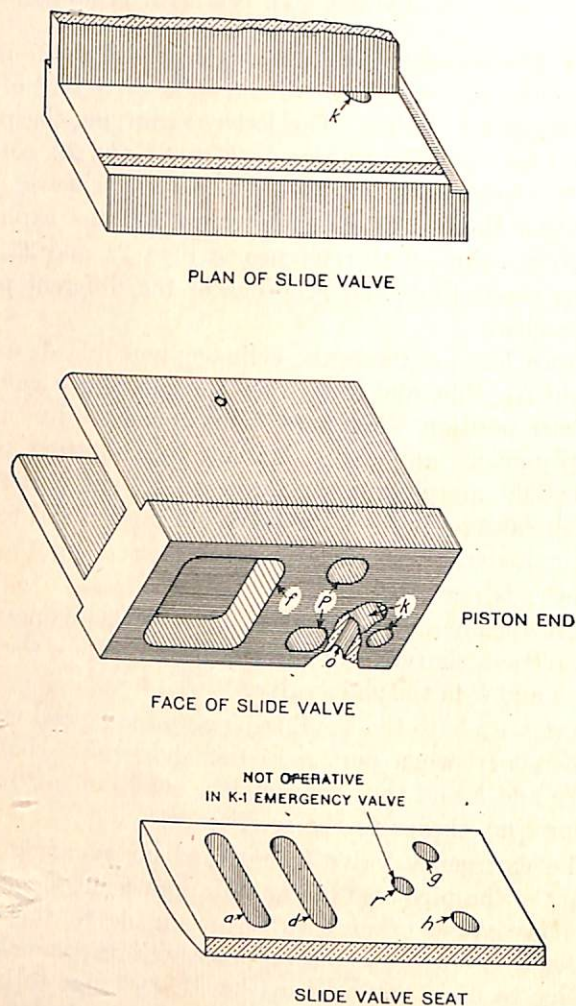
Slide Valve and Slide Valve Seat K-1 Emergency Valve
